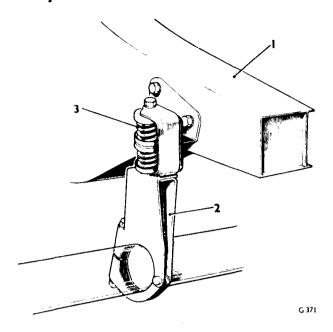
EXHAUST MOUNT WITH 'HANDCUFF' CLAMP
